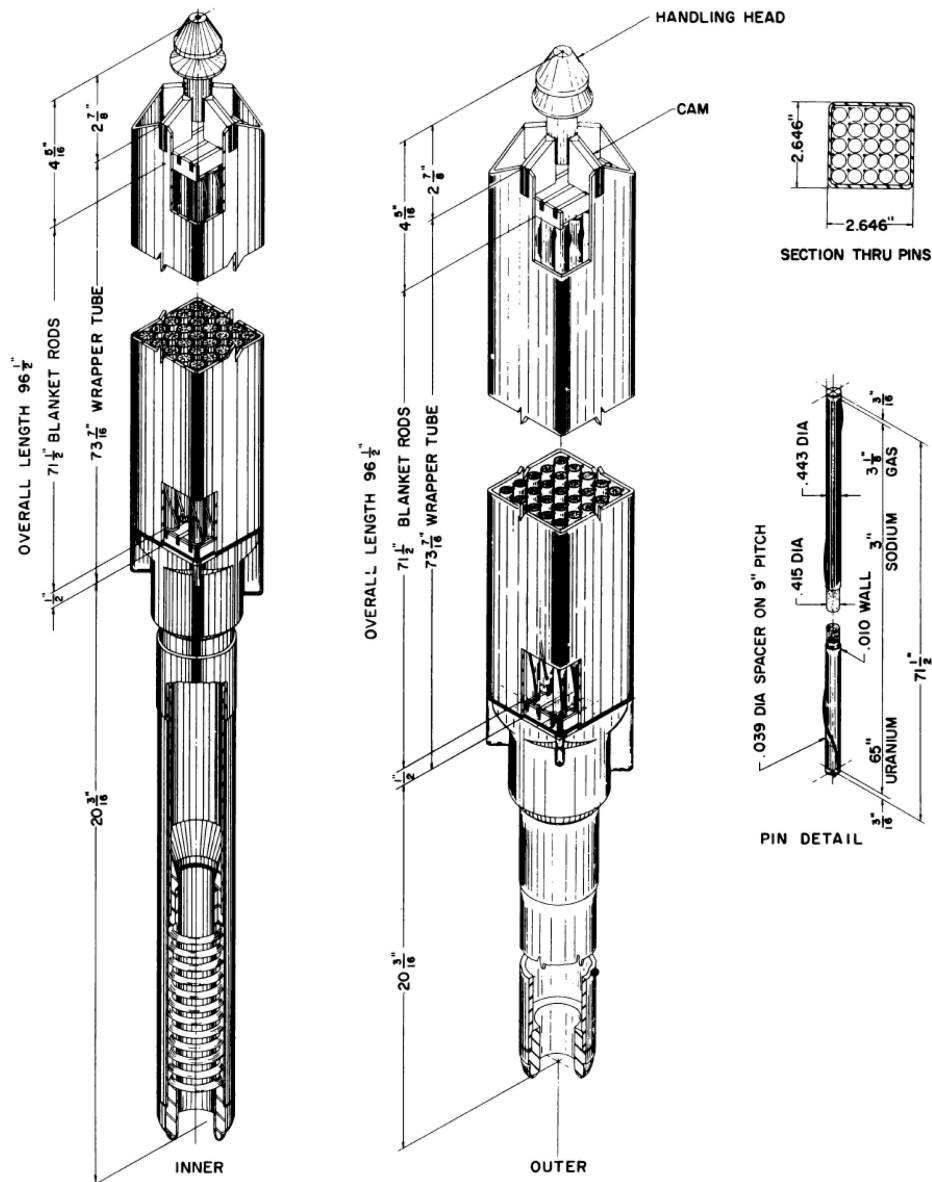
Inner and outer radial assemblies used in the Fermi-1 reactor.
